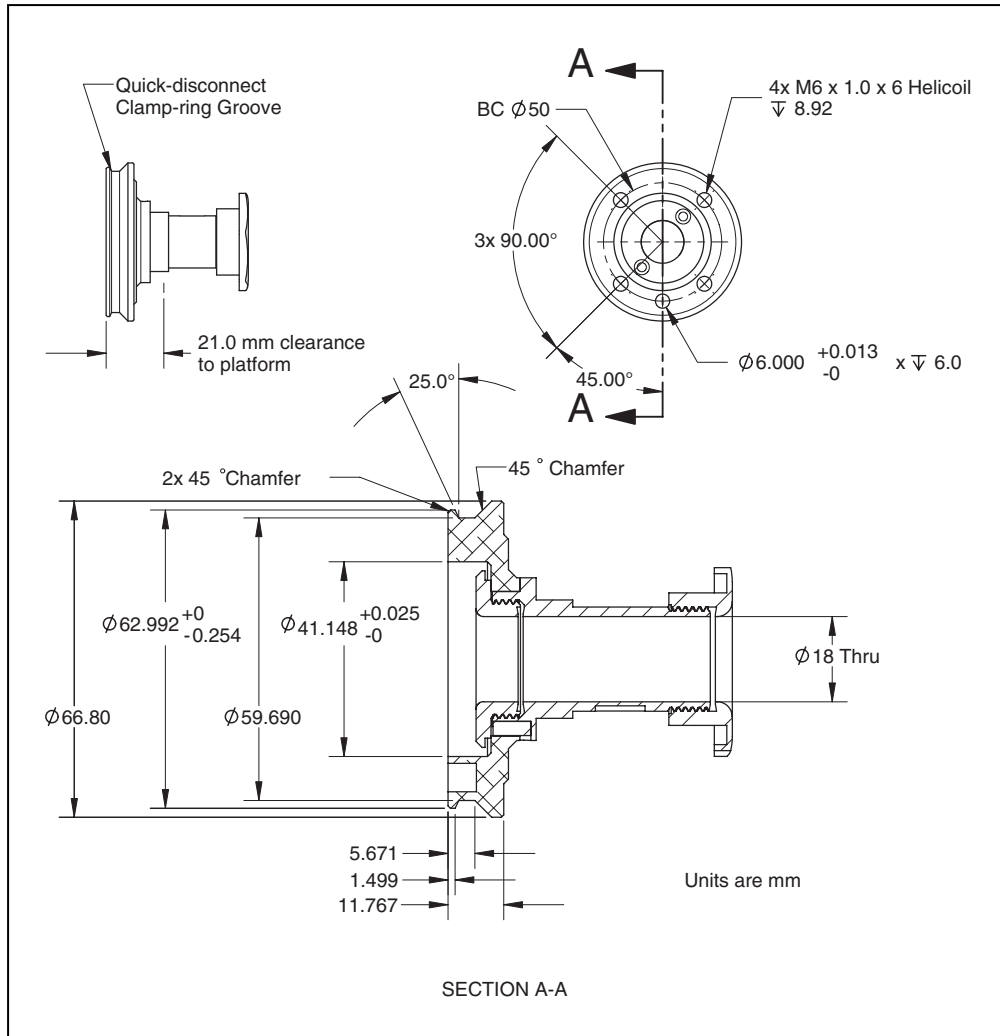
Tool Flange Dimensions, P32, P34 Platforms
